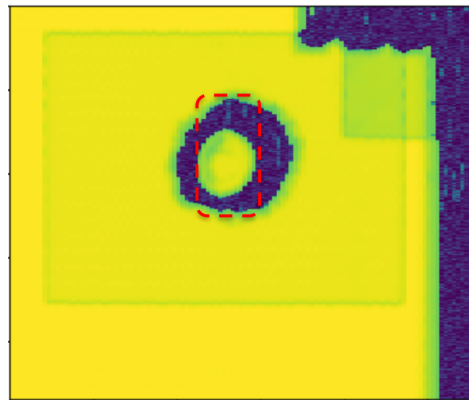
C-scan of specimen WF-600N-3.5sec, the specimen with the largest achieved re-consolidated area. The red rectangle represents the location and size of the sonotrode during welding.
